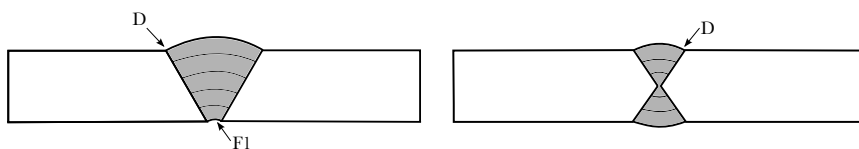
Butt weld in a one- and two-side configuration.
